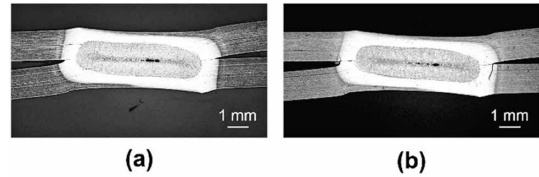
Cross-section images of welds (a) without LME crack, (b) with type C crack
